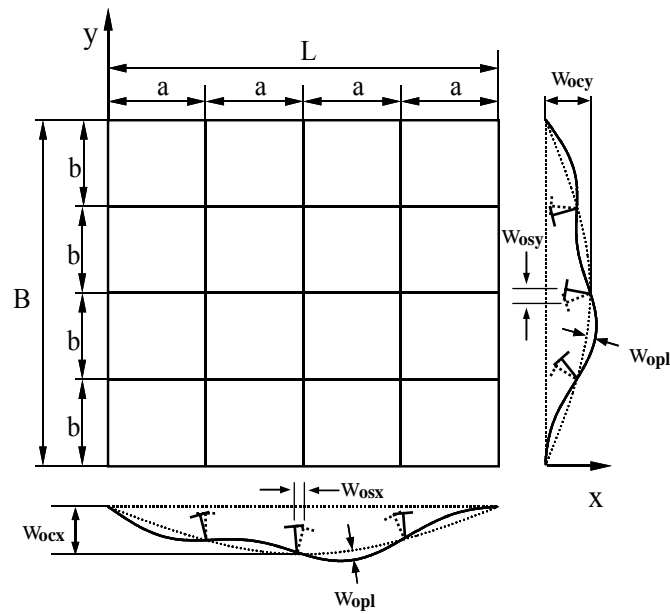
A profile of weld induced initial distortions in a stiffened plate structure
